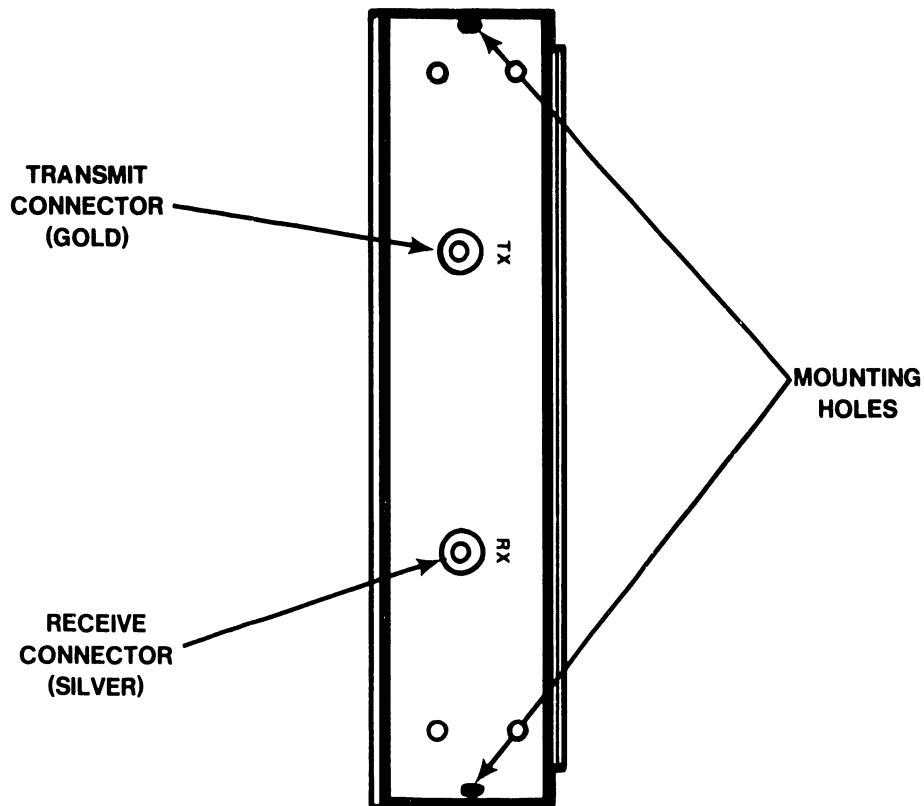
A. Wangnet P-Band Modem Panel Assembly Removal
